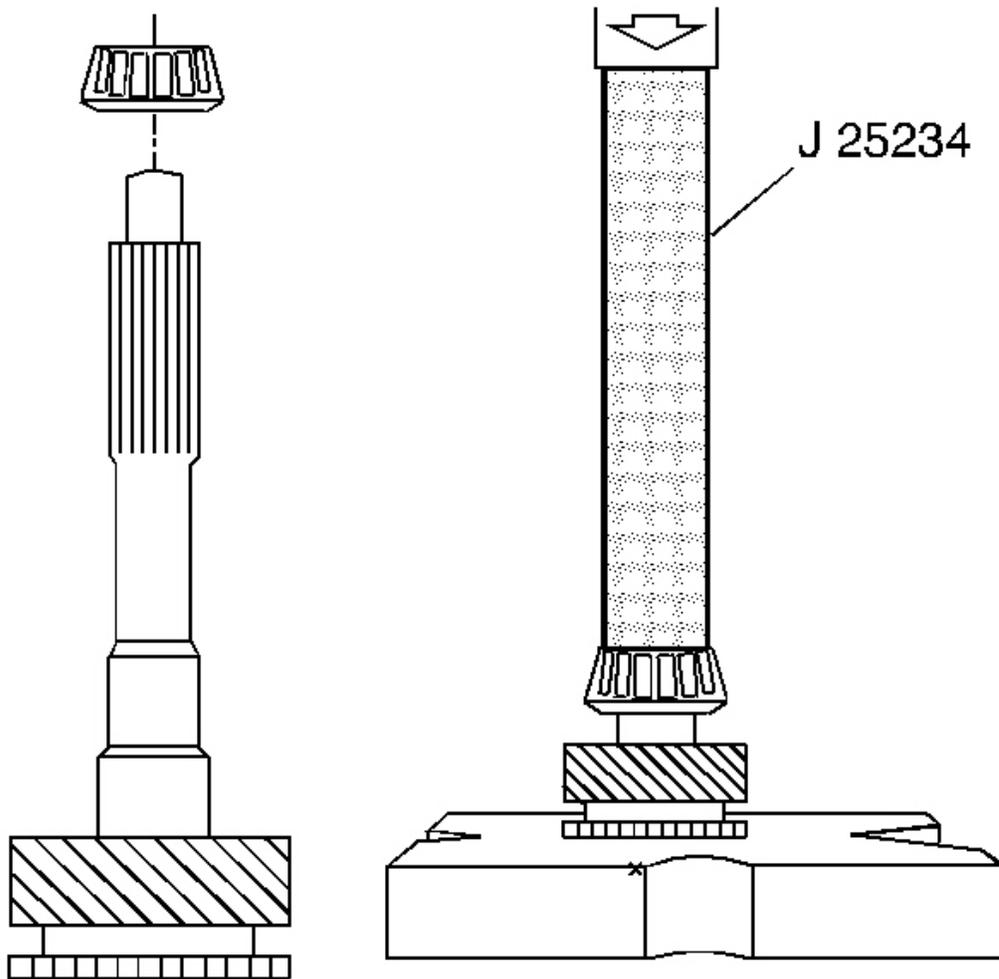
Installing Tapered Bearing On Input Shaft Using J 25234
